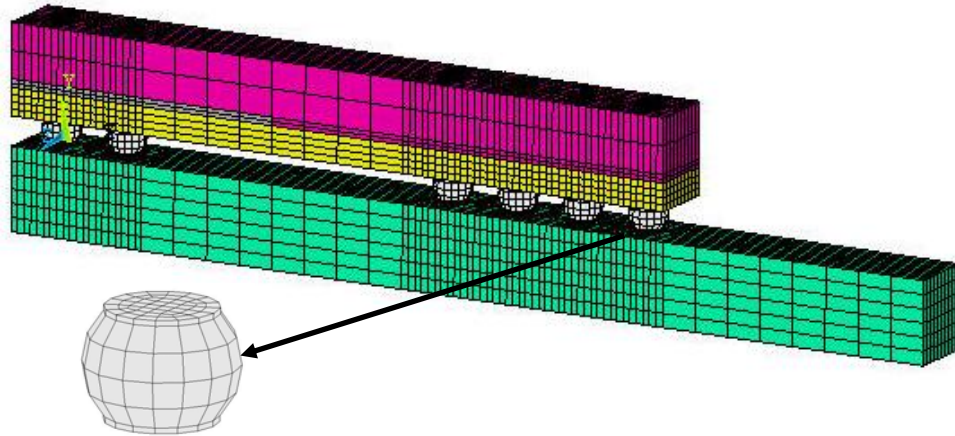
A strip 3D FEA model for PBGA272 assembly
